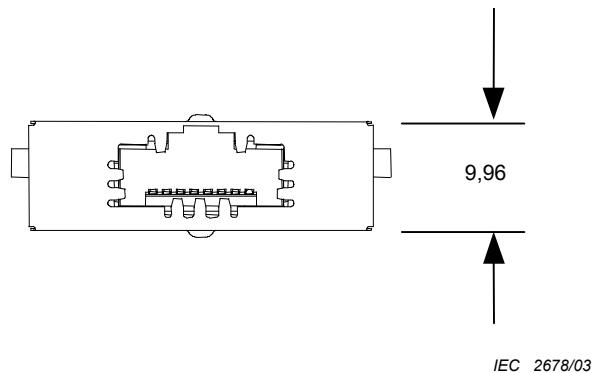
Front view fixed board connector (XB) straddle mount (version 2) (TB)
